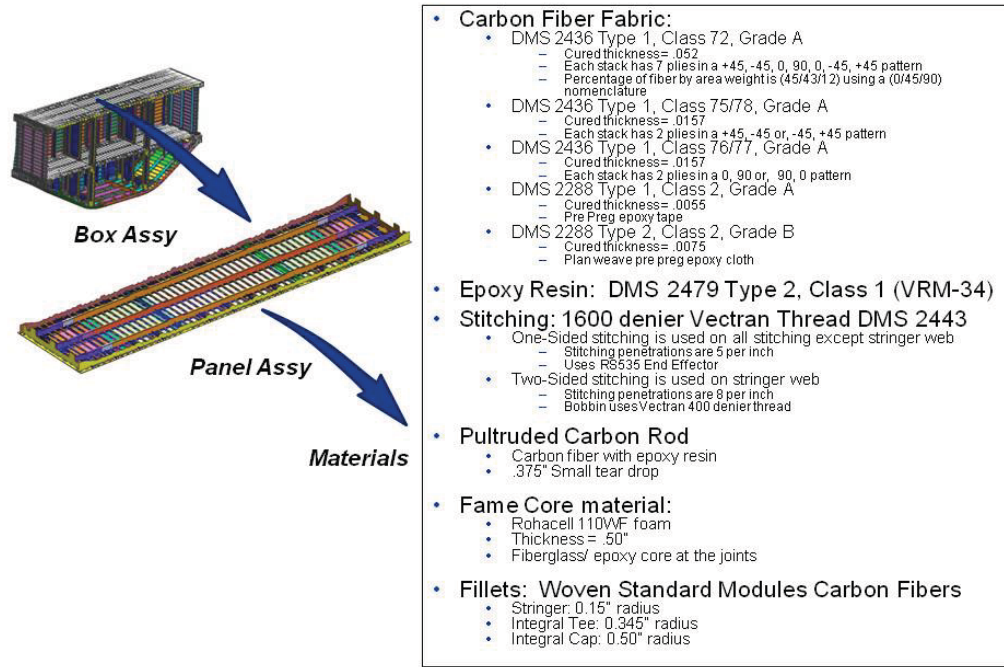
PRSEUS PANEL MATERIALS USED FOR MULTI-BAY BOX SPECIMEN
